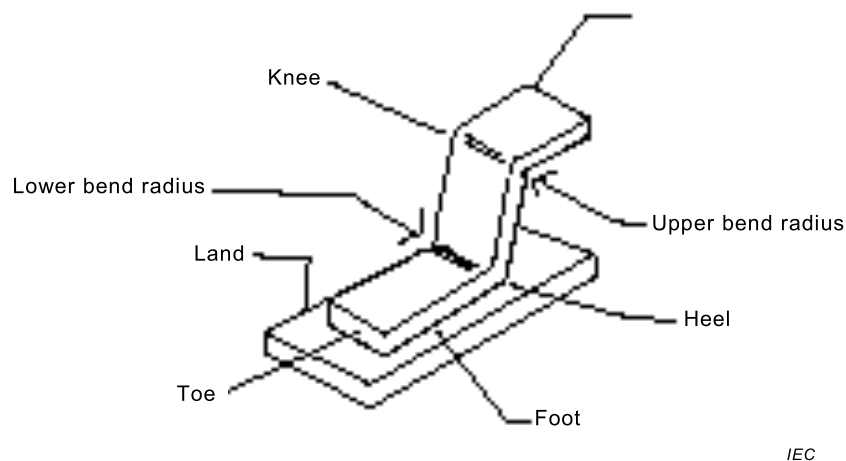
Leaded surface-mount component – Gull wing-shaped lead
